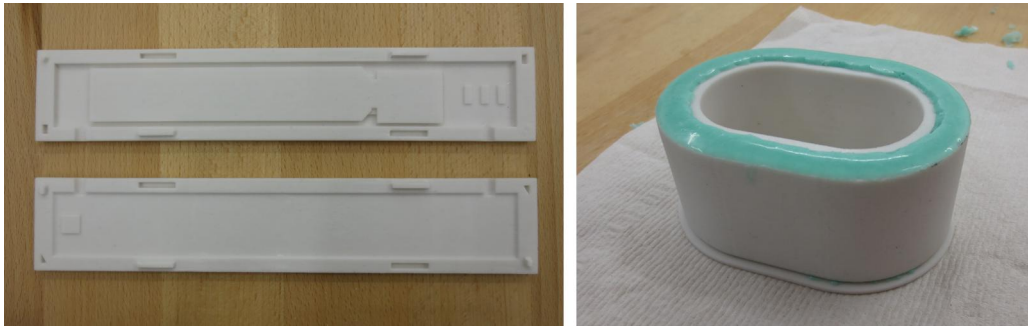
Molds for flat silicone straps were 3D printed in two pieces. The molds for closed bracelets were more complicated and consisted of three interlocking 3D-printed parts (outer, inner, bottom).
